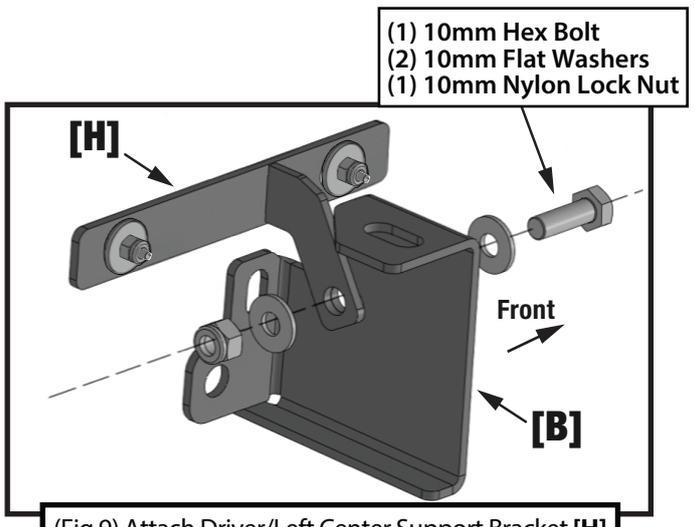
Attach Driver/Left Center Support Bracket [H] to the pinch weld mounting slots with its lower tab on the rear side of Driver/Left Center Mounting Bracket [B]
